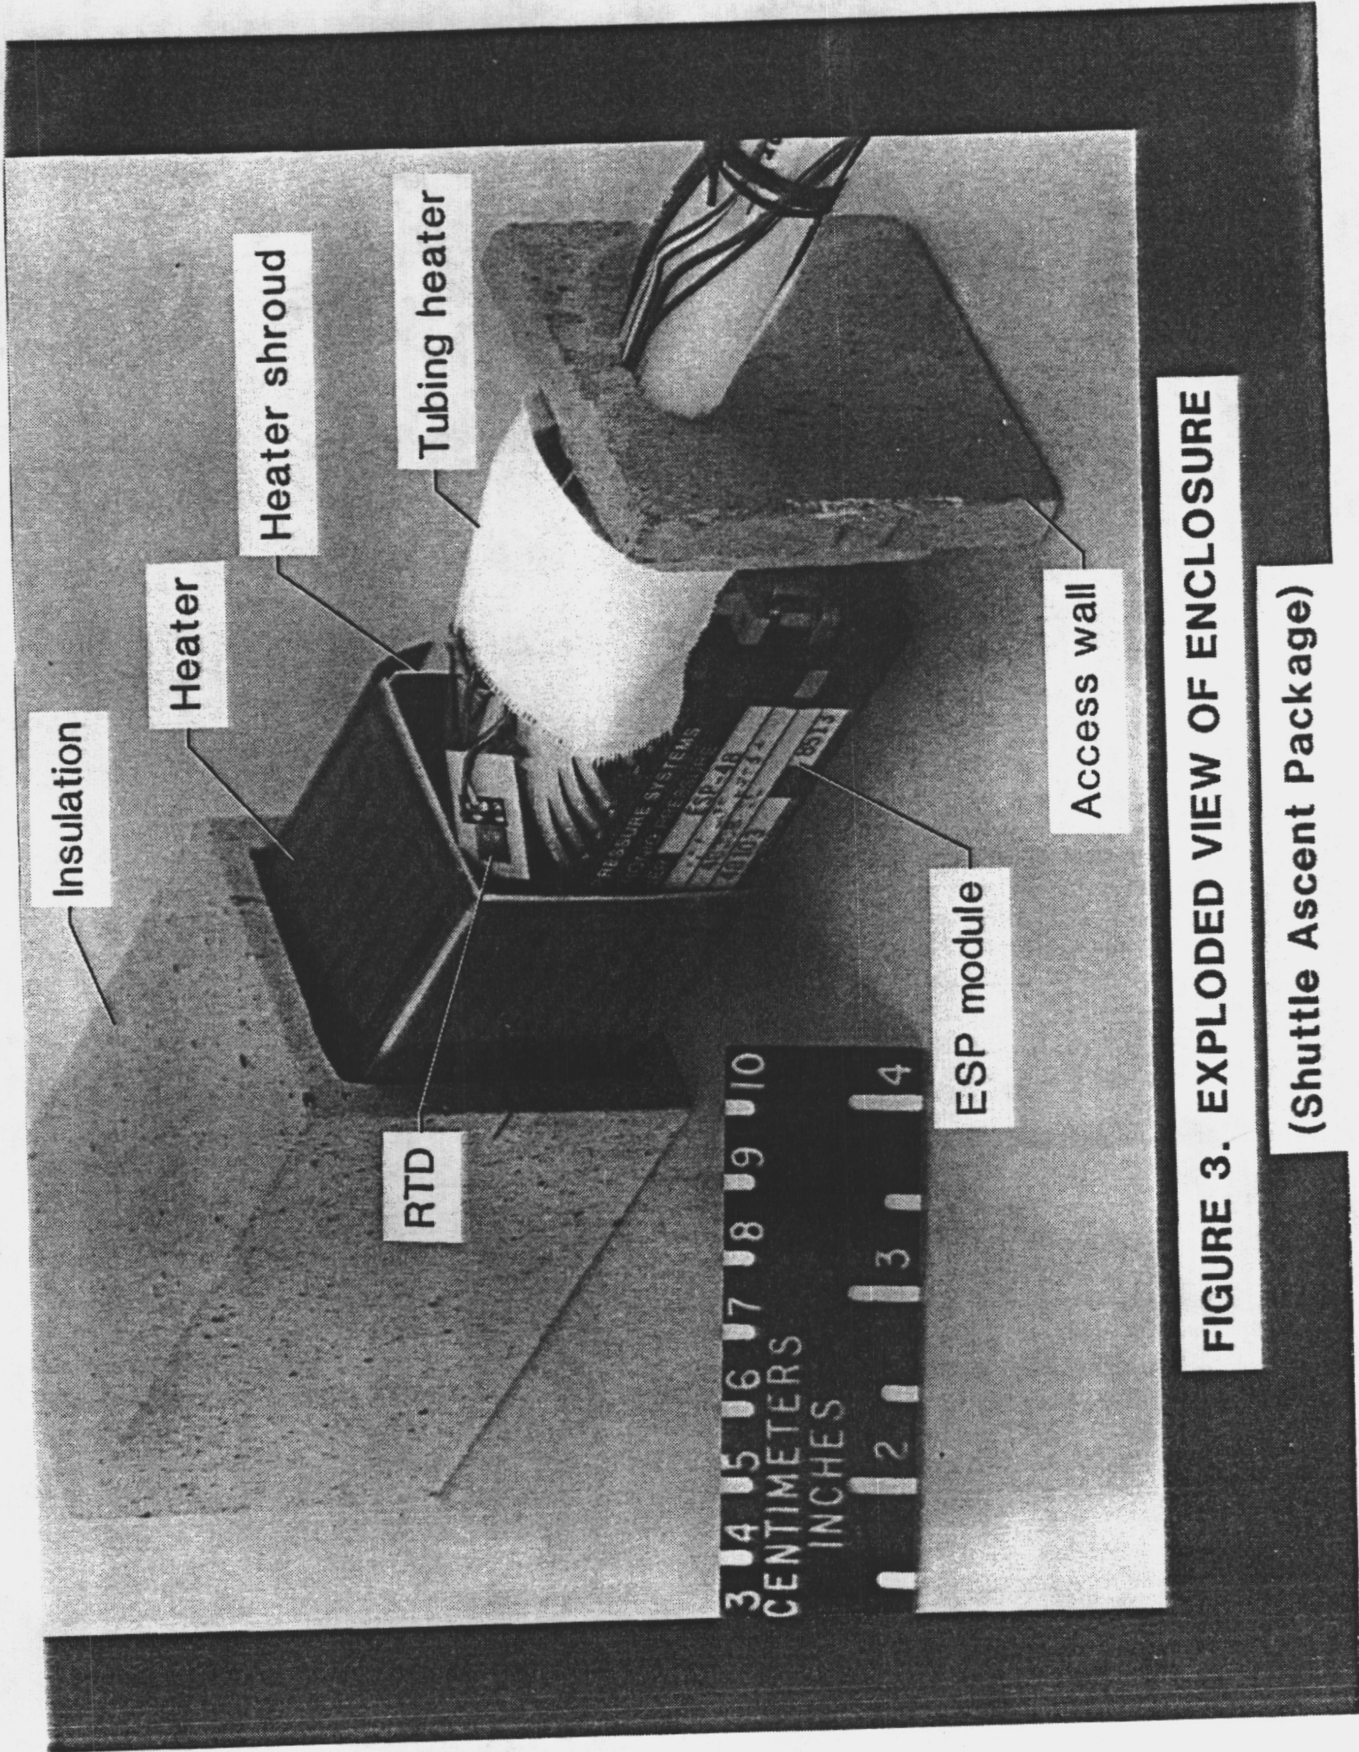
EXPLODED VIEW OF ENCLOSURE
